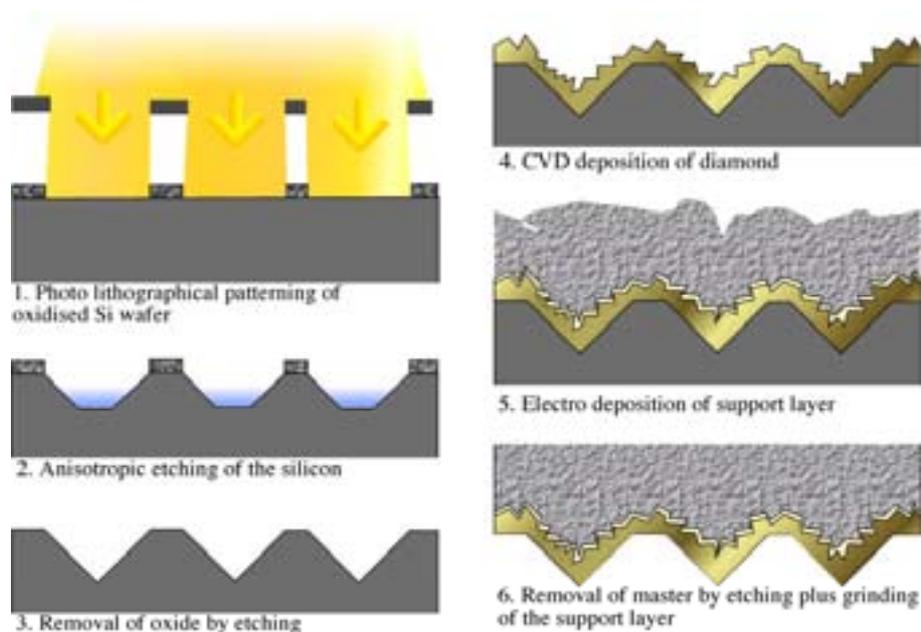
The replication technique involving six main steps; 1) patterning of a silicon wafer surface, 2) anisotropic etching to shape the mould, 3) removal of oxide layer 4) diamond deposition onto the mould, 5) nickel backing to offer the thin diamond coating support and finally 6) exposure of the final diamond surface by removal of the silicon plus planarisation of the backing.
